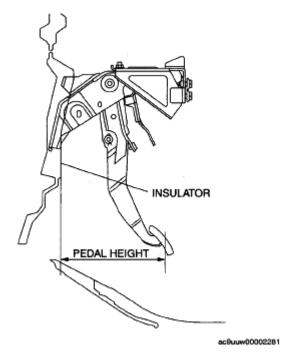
Identifying Pedal Height Courtesy of MAZDA MOTORS CORP.
